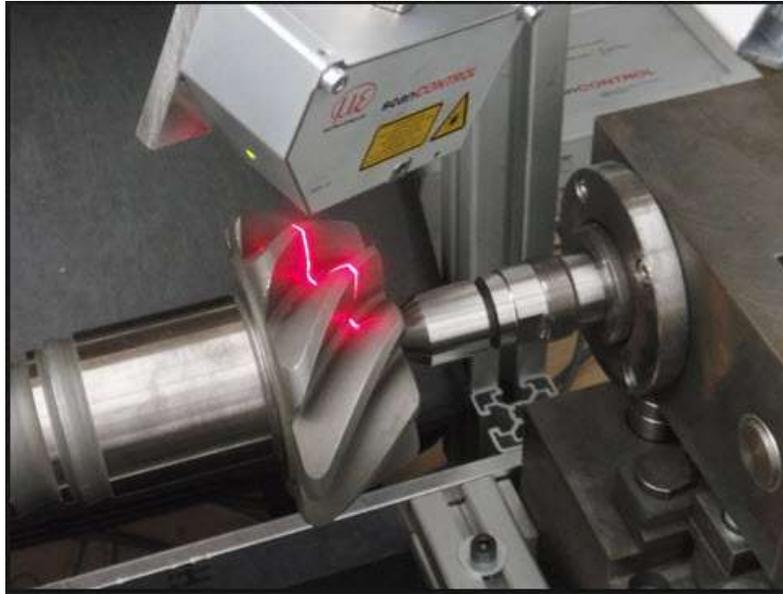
COUNTING TEETH ON A MILLING TOOL
